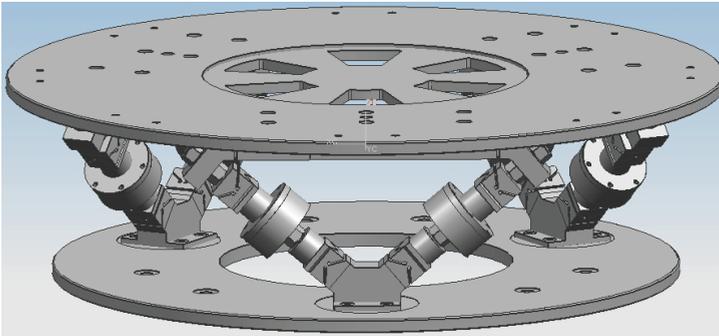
A novel sizable 6-axis force sensor prototype with flexible joints
